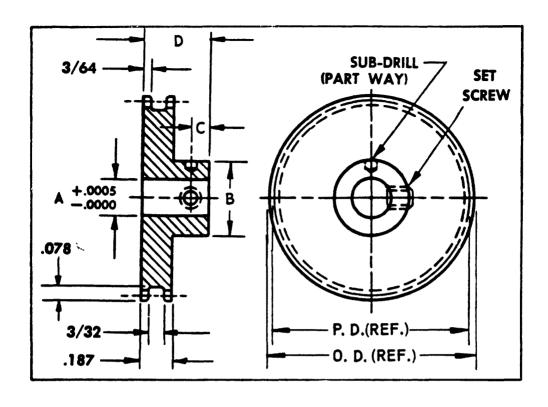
Precision Industrial Component "No Slip" geared pulley.
